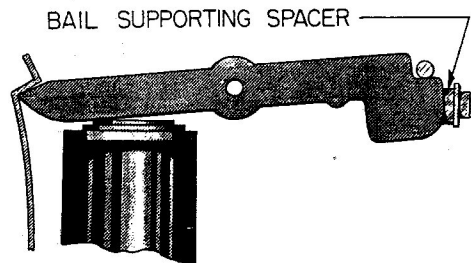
CAMSHAFT SWITCH ADJUSTMENT AND OPERATION
